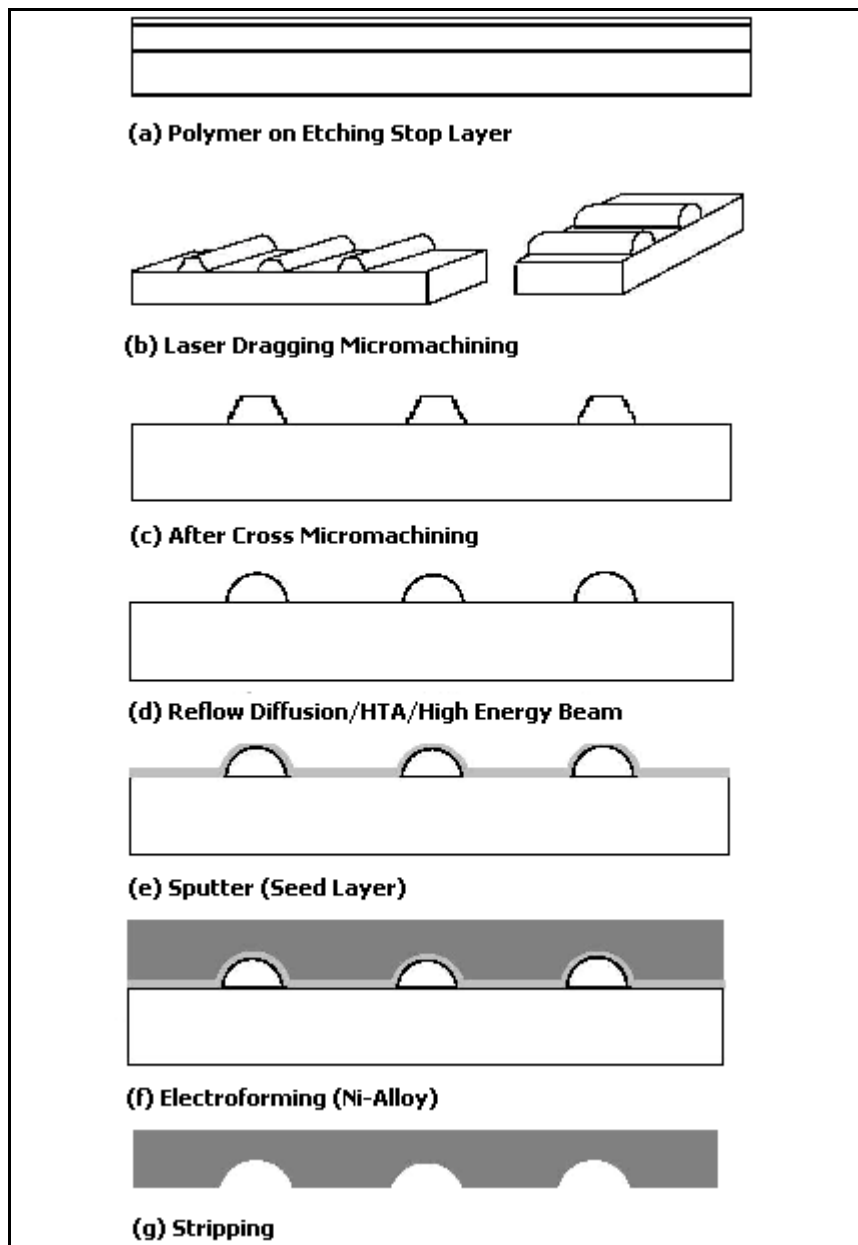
Schematic drawing of the laser ablation fabrication process [2].
